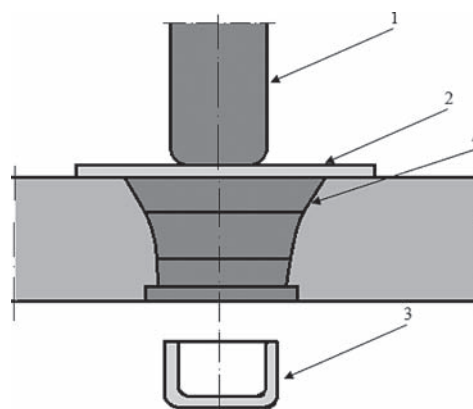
Stamping process diagram: 1- a punch, 2- a material, 3- a drawpiece 4- a die [8,9].
